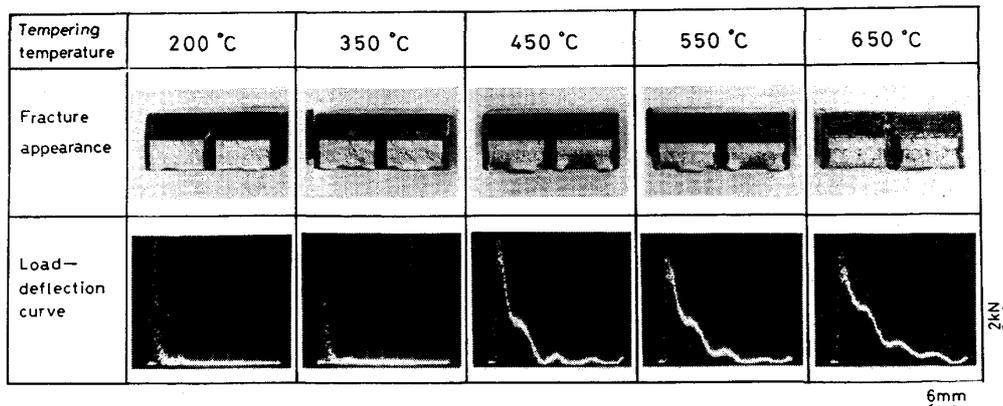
Typical fracture appearances and load-deflection curves obtained in fatigue cracked specimen
